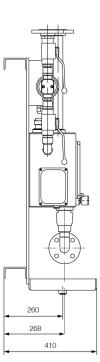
Cylinder lubricating oil pipes, Alpha Mk 2 lubricator
